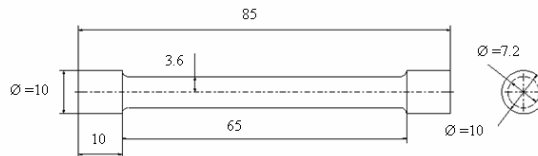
Scheme of the smooth specimen (ASTM D638-91 and D2990, all dimensions in mm)
